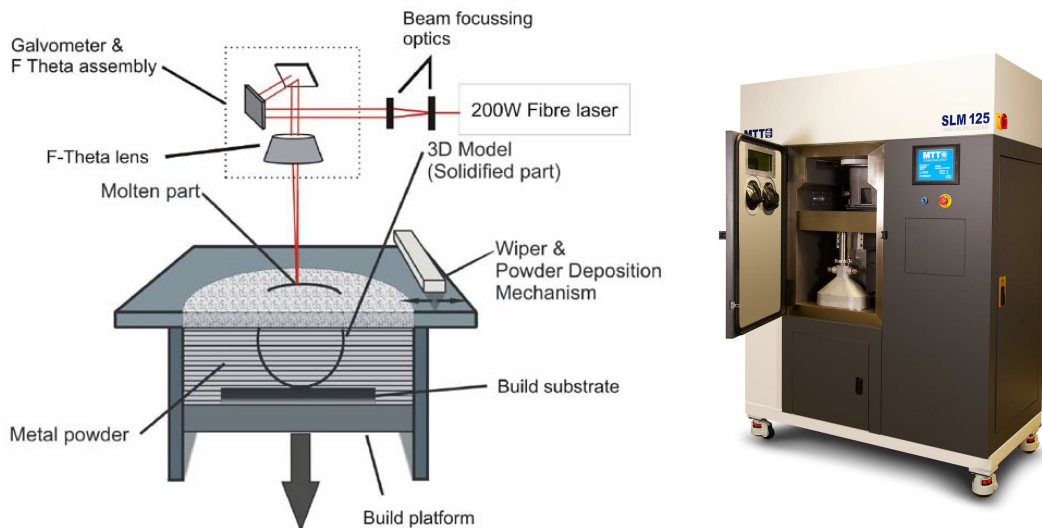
Selective laser melting mechanism (right); Renishaw SLM125 machine used to manufacture the specimens used in this study (left)
